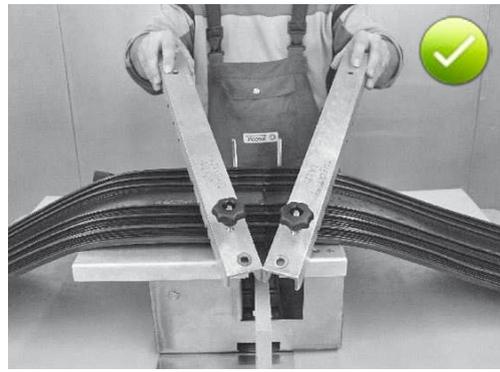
Removing the finished butt joint from the SG 320 L automatic welding machine
